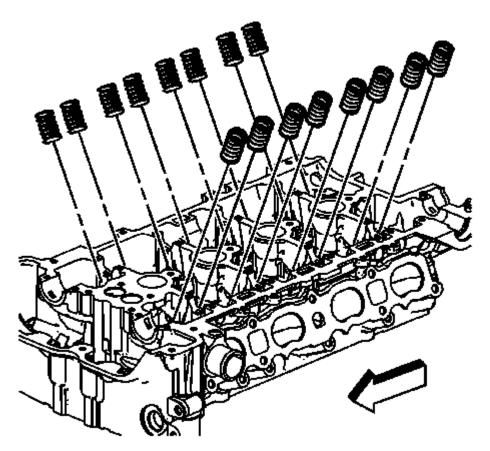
Valve Springs Courtesy of GENERAL MOTORS COMPANY
